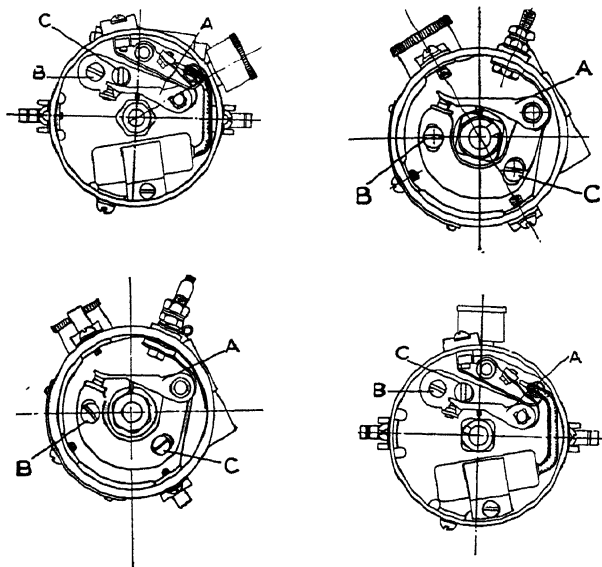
B-MALE SIX-CYLINDER DOUBLE BREAKER, THREE-LOBE CAM TYPE, ADAPTABLE TO HIGH-SPEED ENGINES
